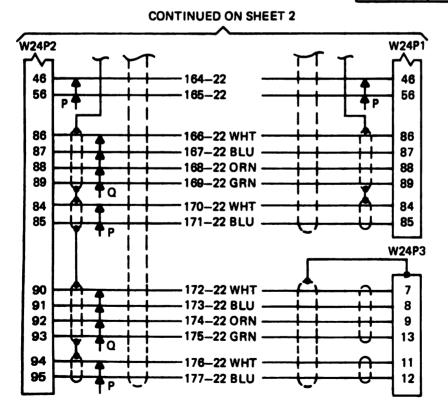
W24 Cable Assembly Wiring Diagram (Sheet 1 of 2)
